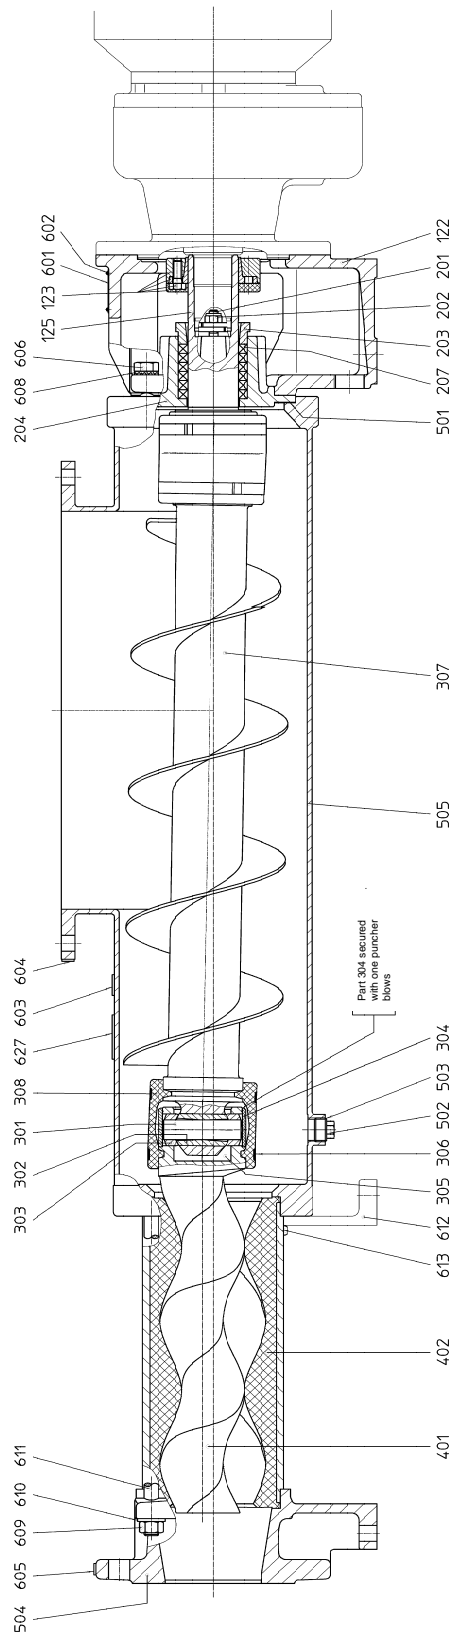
Sectional drawings of series AEB.N; ZE construction type
